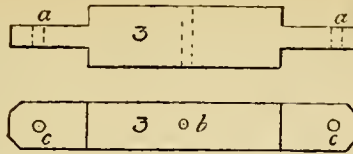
CROSS-PIECE BETWEEN TREADLE
